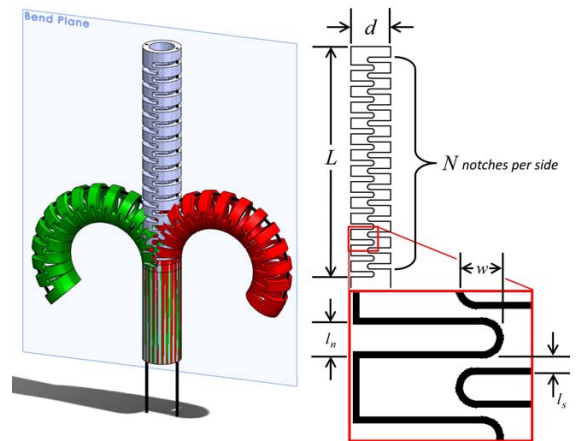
CAD model of the DM with anticipated bending limits and highlighted bend plane (left) and DM projection onto the bend plane illustrating design variables (right).
